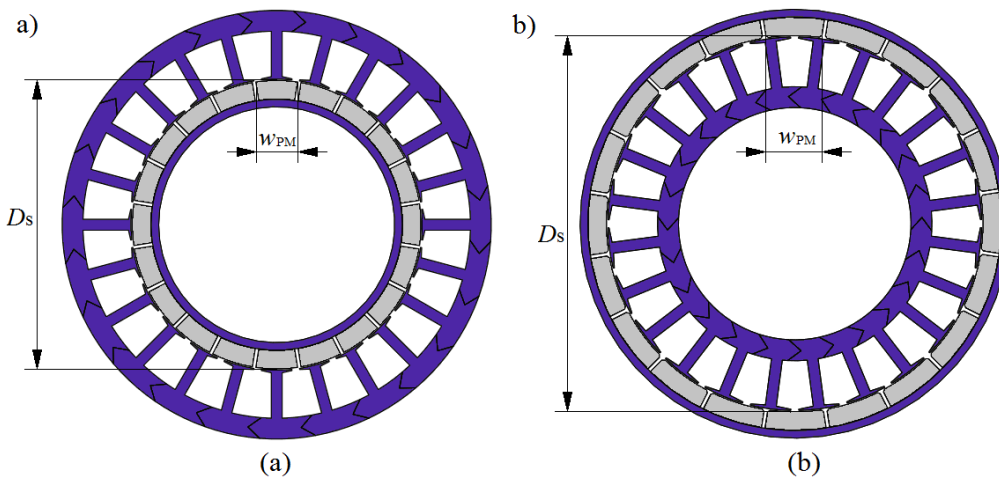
a) Conventional inner rotor PMSM. b) Outer rotor PMSM. The external dimensions of the machines are the same. The slot area is kept constant in both machines. The relatively high thickness of the stator yoke can be explained by the segmented structure, which requires additional room in the stator yoke for connecting it to the frame of the machine. Ferrite magnets are used in both cases.
